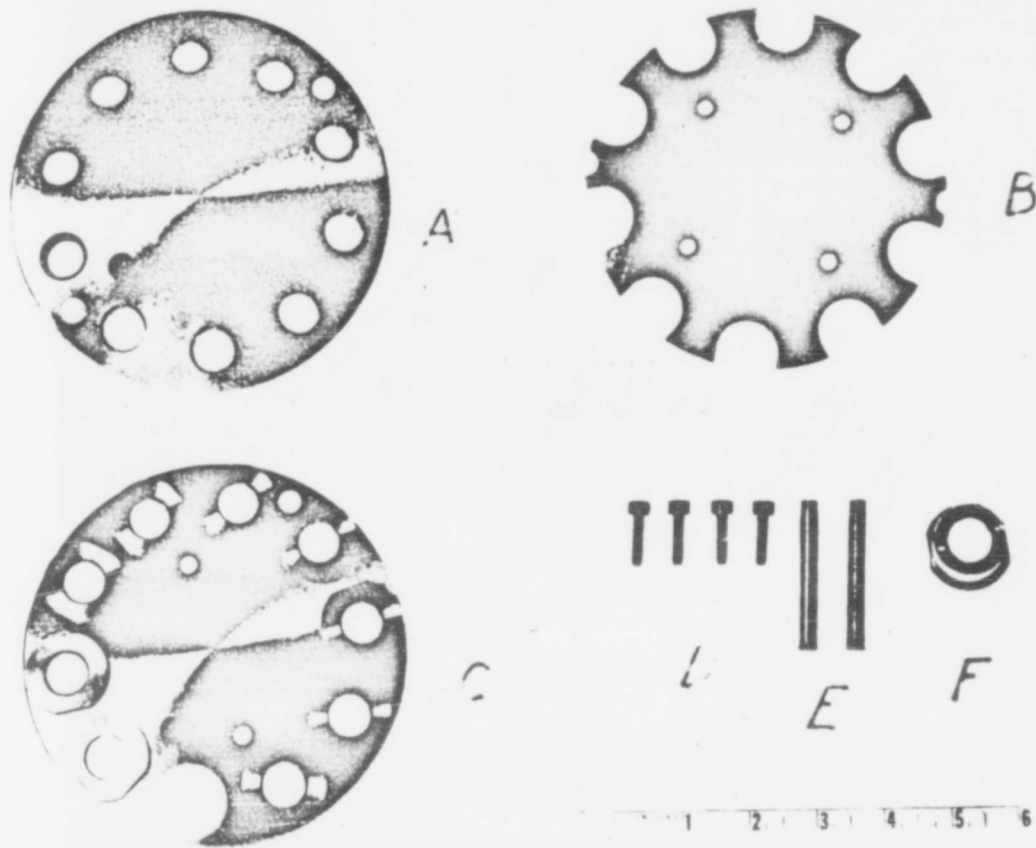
Advance Design Butt-Tensile Specimen Alignment Jig - consists of upper plate (A), gusset plate (B), lower plate (C), screws (D), alignment pins (E) and internally threaded flanged sleeve (F).
